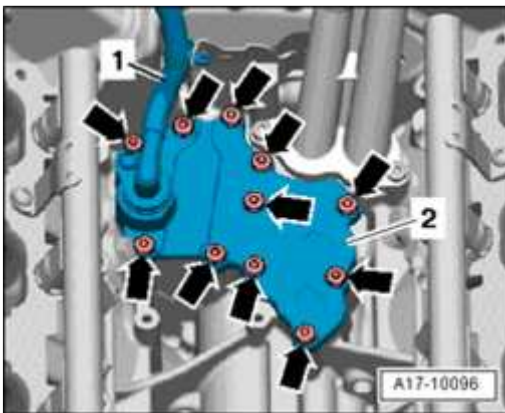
Removing Bolts & Cover With Crankcase Ventilation Hose
